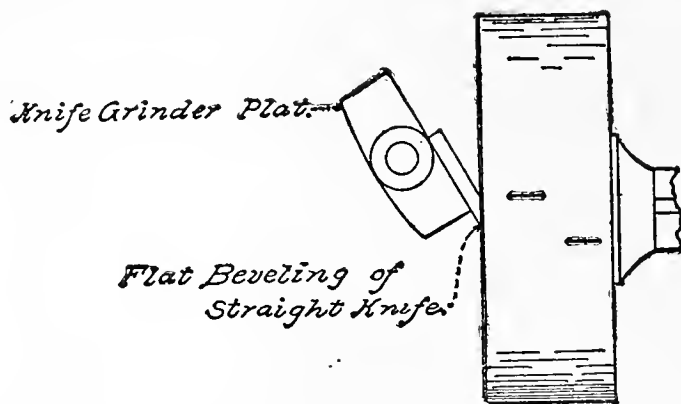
DETAIL SKETCH OF STRAIGHT BEVEL GRINDING OF KNIFE.
